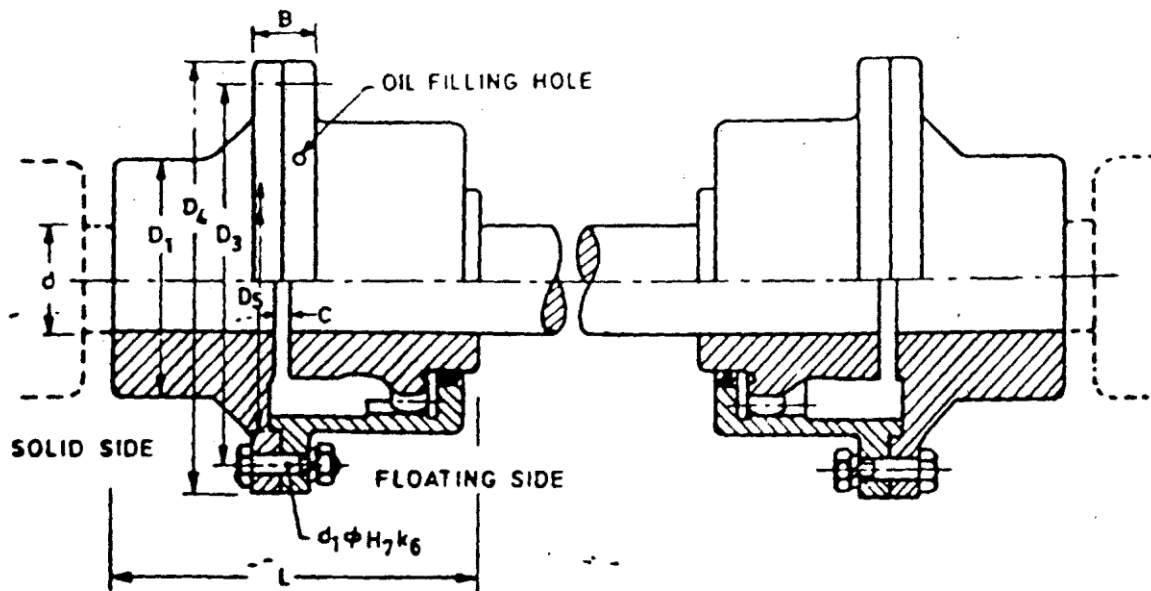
FLOATING SHAFT FLEXIBLE COUPLING
